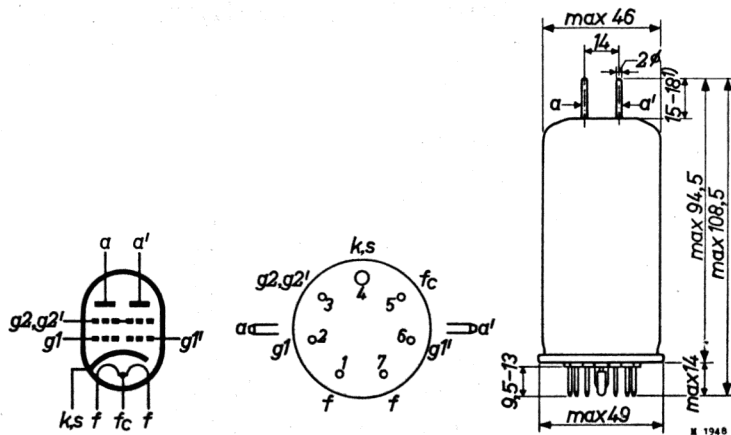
Socket connections and dimensional drawing (in mm) of the QQE 06/40.
